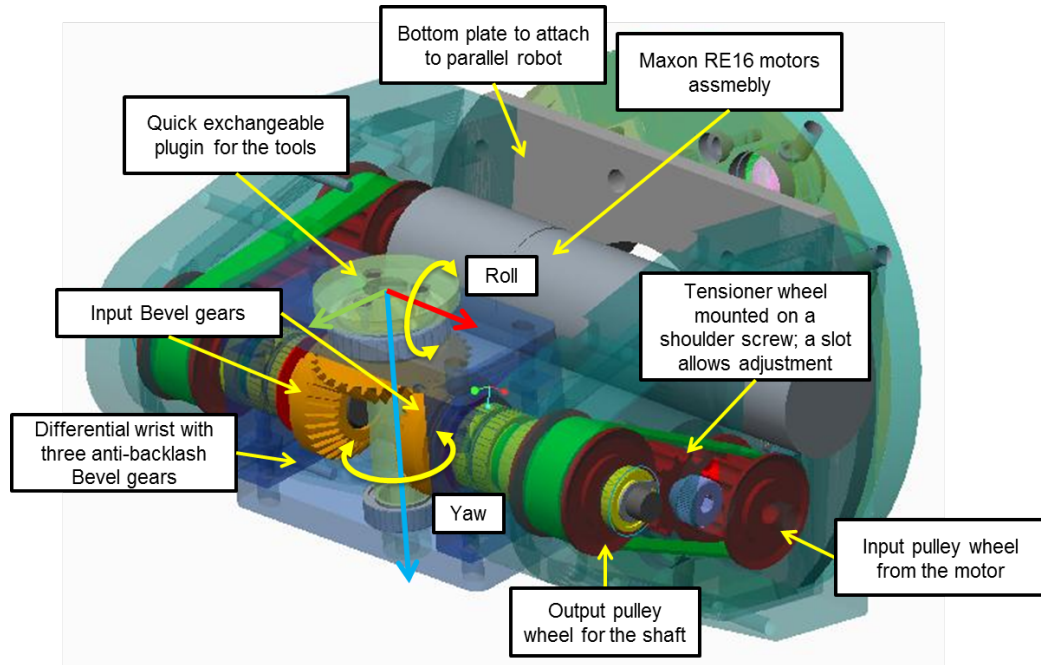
Differential wrist with 2 DoF controlling the roll and yaw motion of the tool stem.
